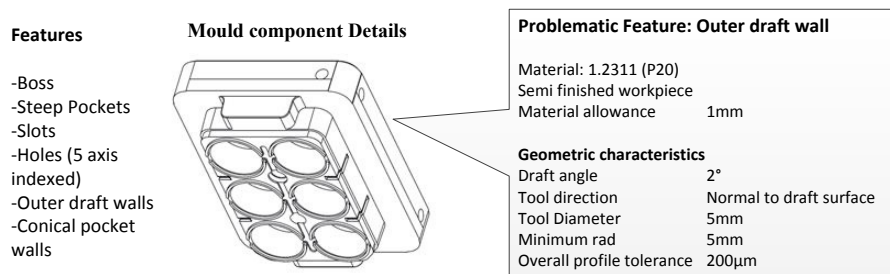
Mould-base component to be manufactured on Hurco VM10ui.
